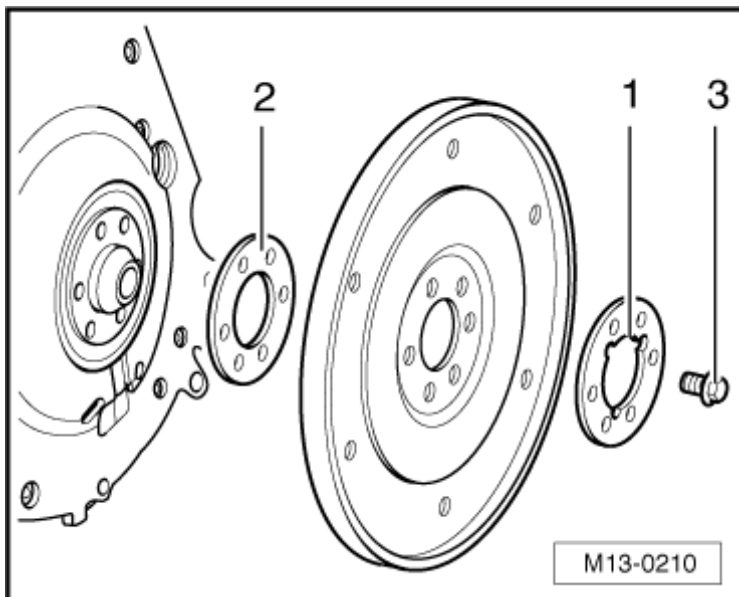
Installing Drive Plate Only By Using Washer With Recesses
